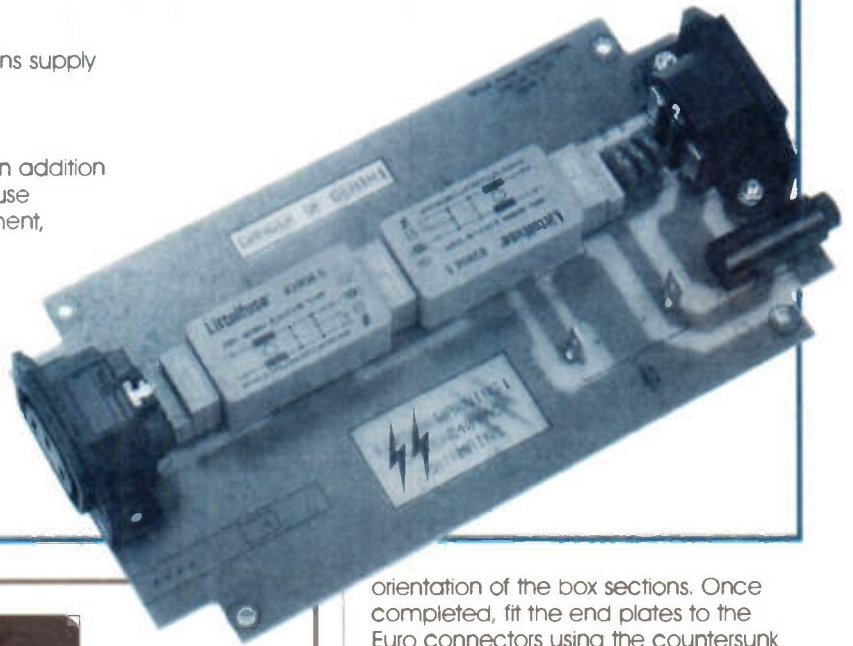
Assembled PCB, with neon lamp and cable disconnected from the Lucar terminals.
